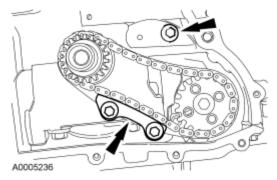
Locating Oil Pump Chain Guide & Shoulder Bolts Courtesy of FORD MOTOR CO.
